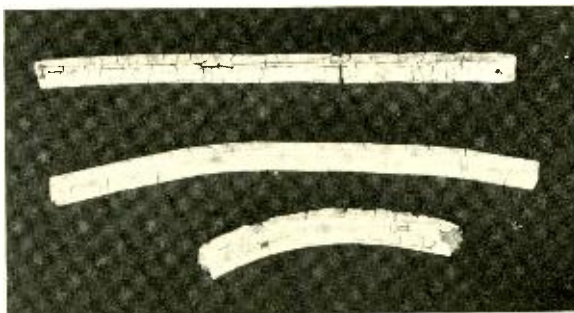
An exhibit from the investigations now being carried out by the Laboratories on aluminum and zinc-base alloy. Some test specimens showing corrosion and disintegration under exaggerated weathering tests
